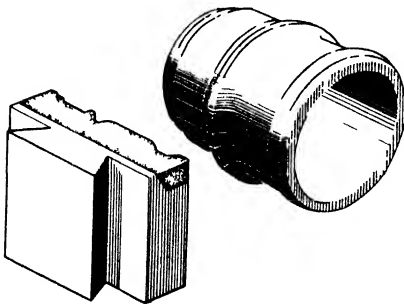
Carbide Tipped Forming Tool and the Profile It Cuts
